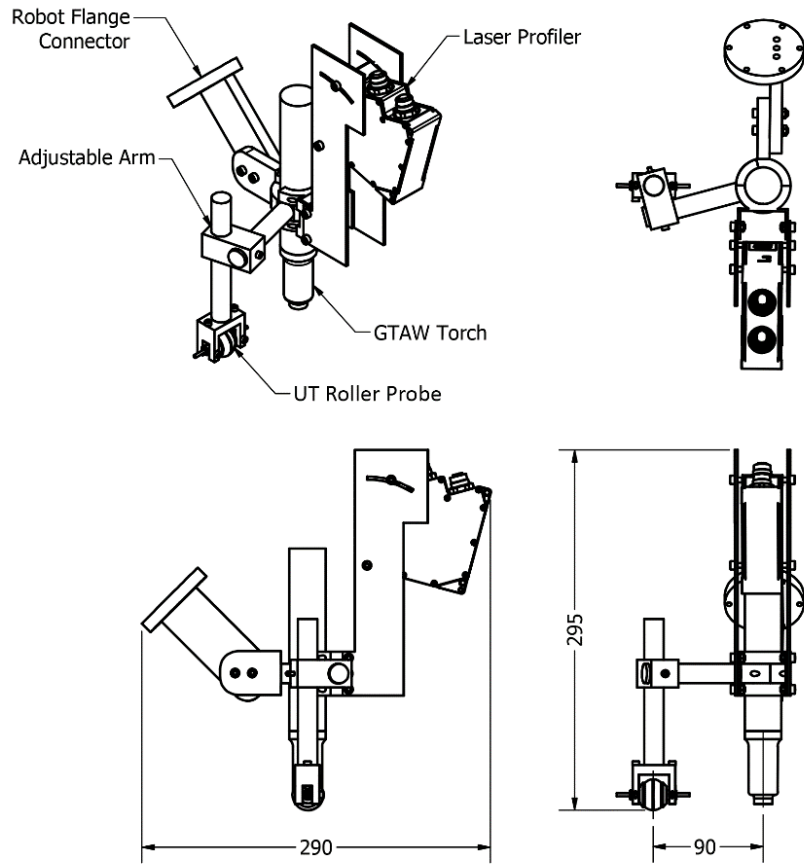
Custom robotic end-effector and ultrasonic wheel probe mount technical detail; all dimensions are in mm.
